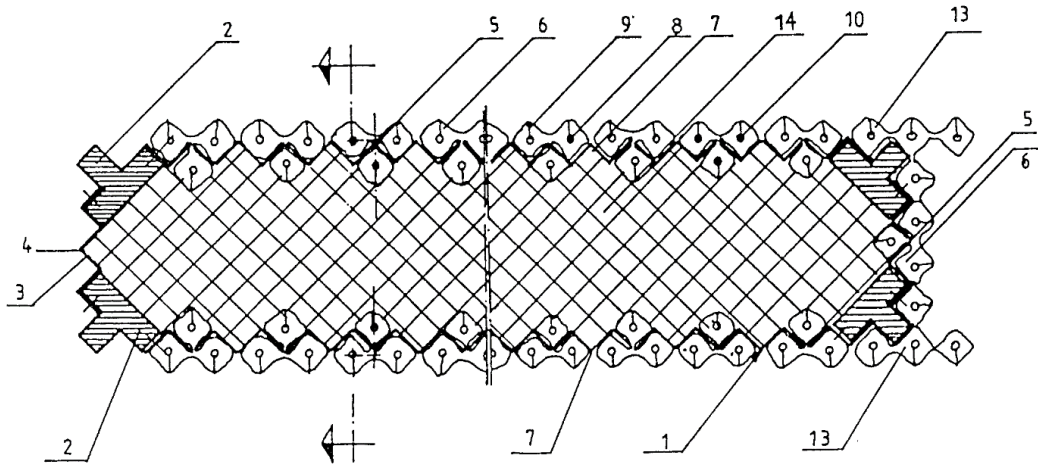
BG 63218 (B1). Multilayer panel with impact-protection and connection between panels. [10]
